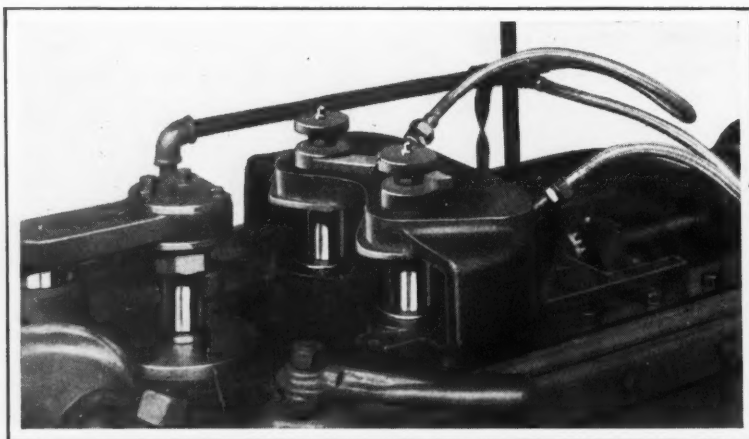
Close-up View of the Burnishing Roll and Work-spindles on Bolender Gear Burnishing Machine
